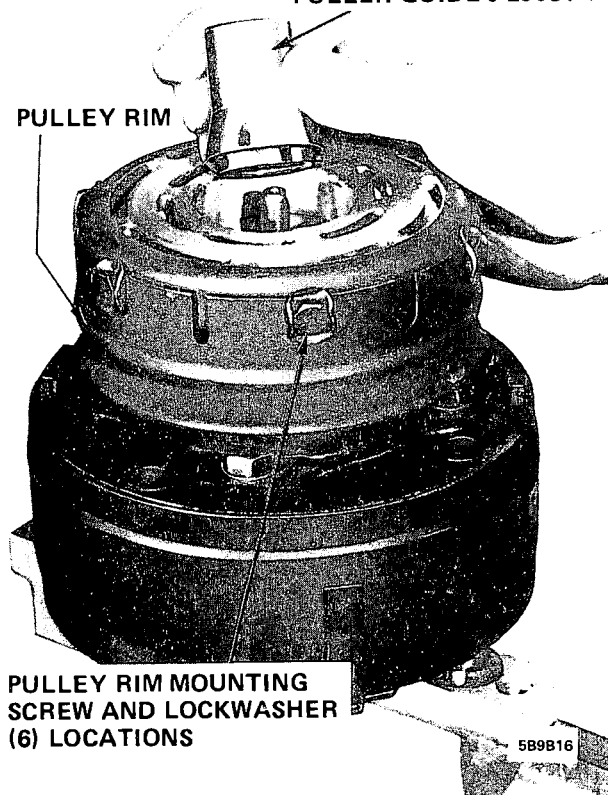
B-40 - Installing Rotor and Bearing Pulley Guide - 4 Cylinder Compressor
